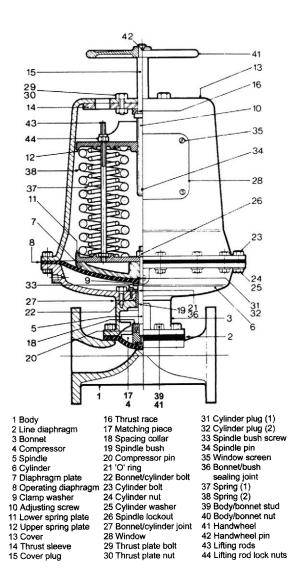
A diaphragm operated weir type diaphragm valve with handwheel Courtesy of Crane Process Fluid Technologies
